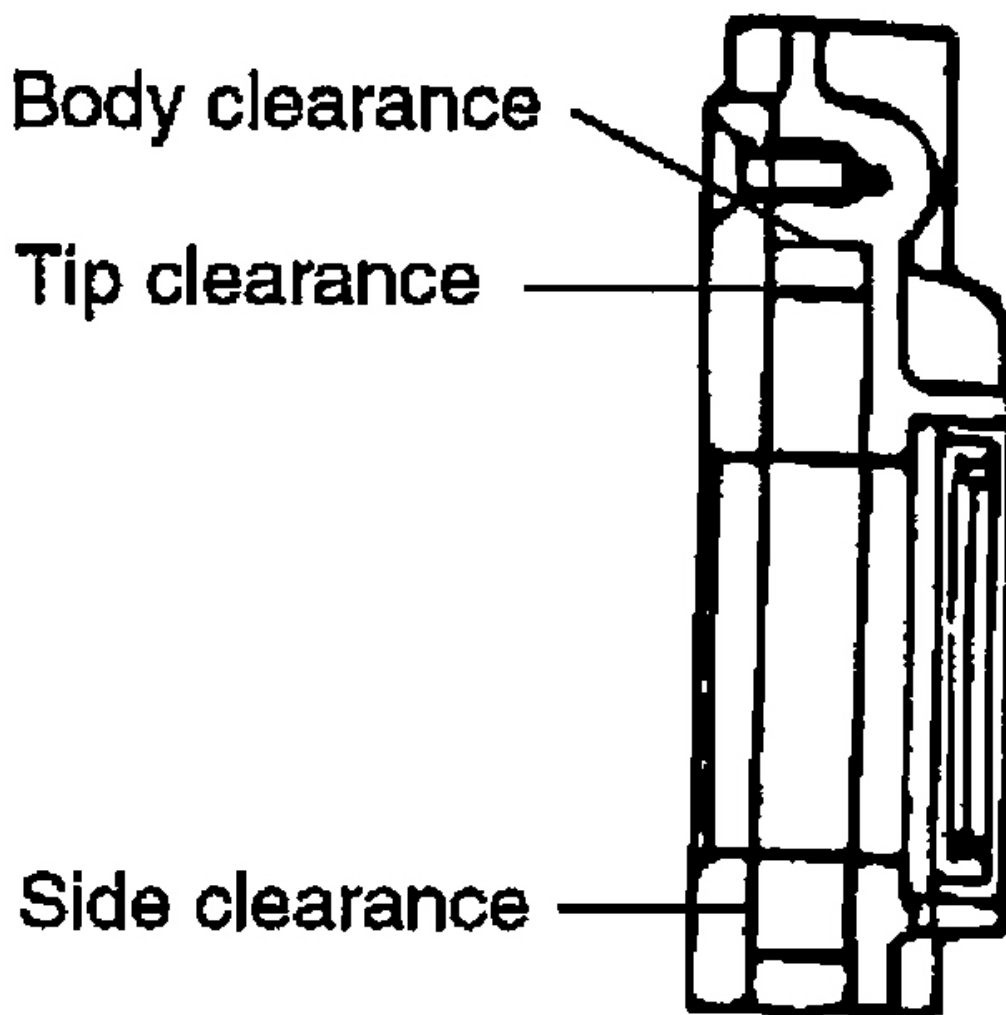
Checking Tip Clearance On Pump Rotor
